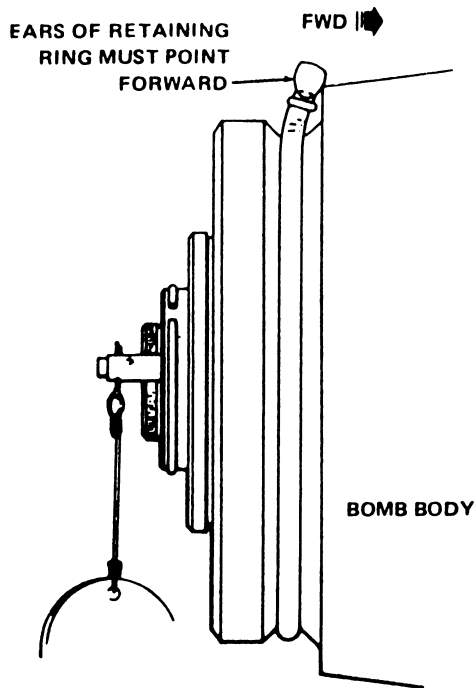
Ears pointing forward at 12 o'clock position hole.
